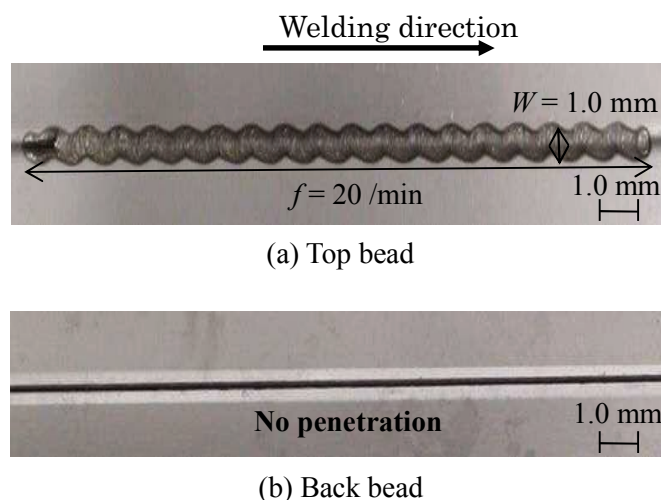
Appearance of Nd:YAG Laser welding beads
